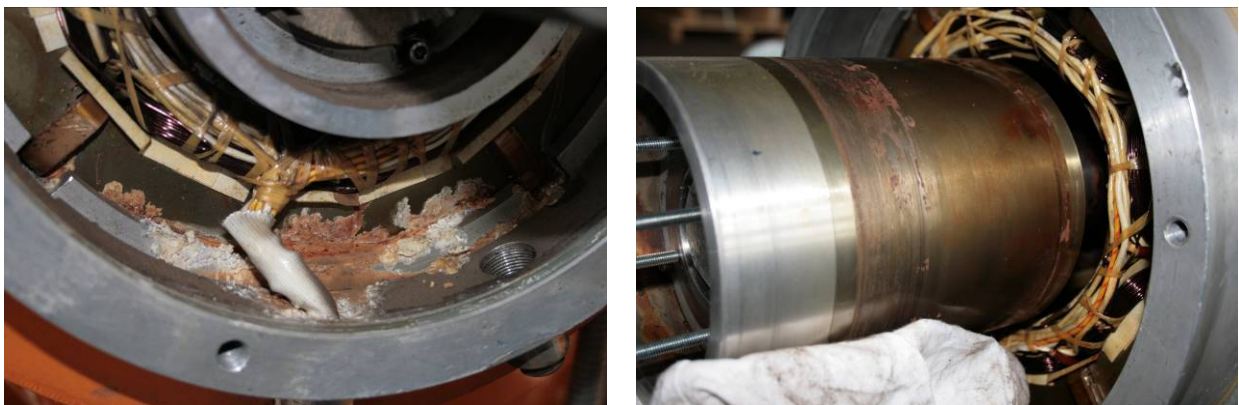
DE-sited radial AMB with corrosion marks due to water ingress
